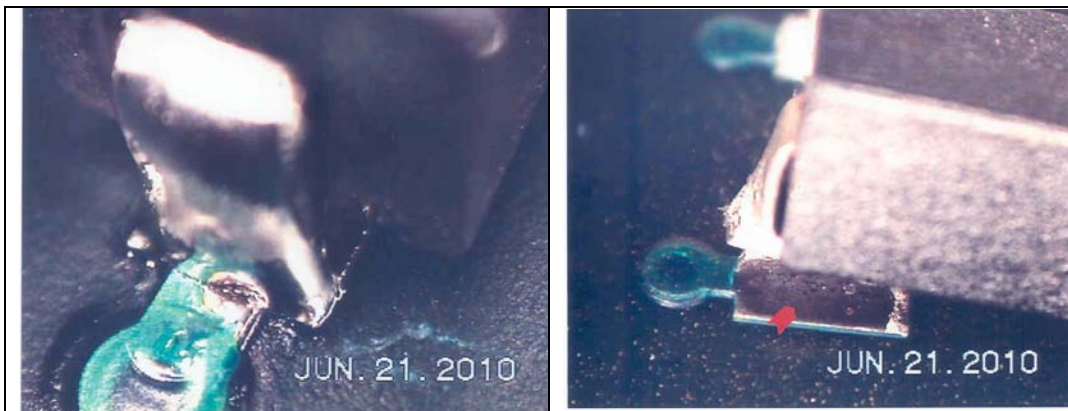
DEU-II SAC solder failure to a graphics CCA ferrite bead (2 photos of same failure)
